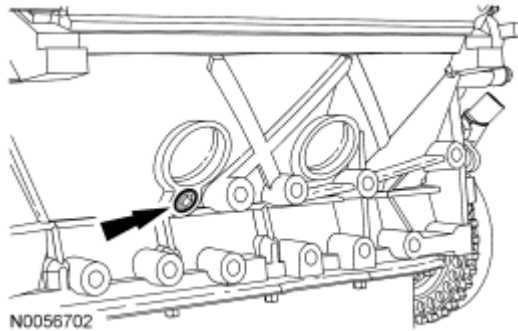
Locating Cylinder Block Coolant Drain Plugs
